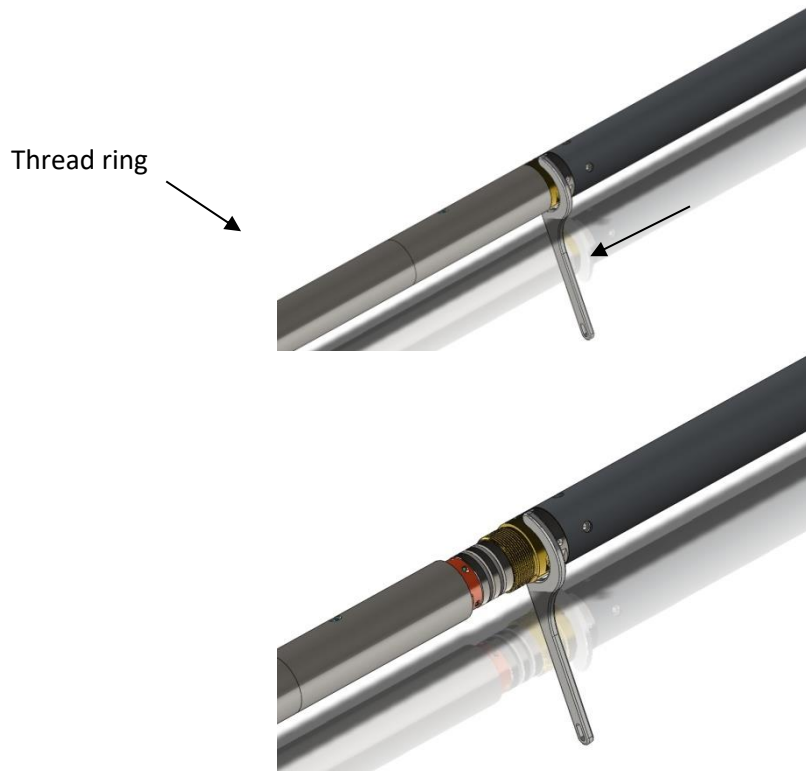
Unscrewing the thread ring and removing the bottom sub
